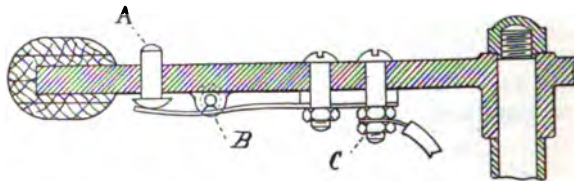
The Searchmont Steering Wheel with Electric Circuit Breaker. One terminal is at C, the other at pin, B. By depressing button, A contact may be broken. By withdrawing pin, B, circuit may be interrupted, rendering it impossible to start the engine.
